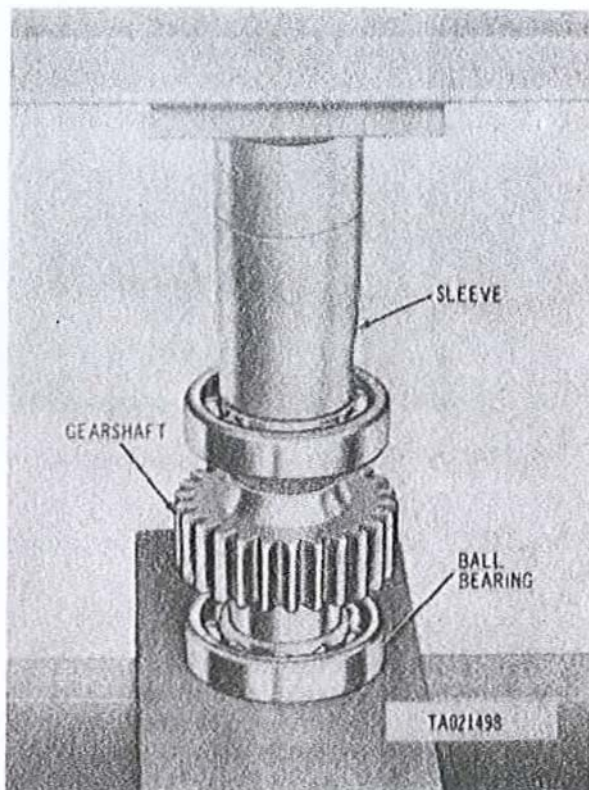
Pressing ball bearings in starter driven gearshaft. suitable arbor press. Press gearshaft from the front ball bearing in a similar manner.
